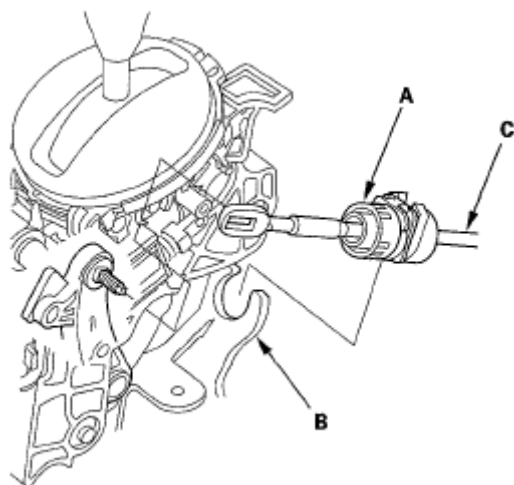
Identifying Socket Holder Retainer And Socket Holder Bracket With Shift Cable
